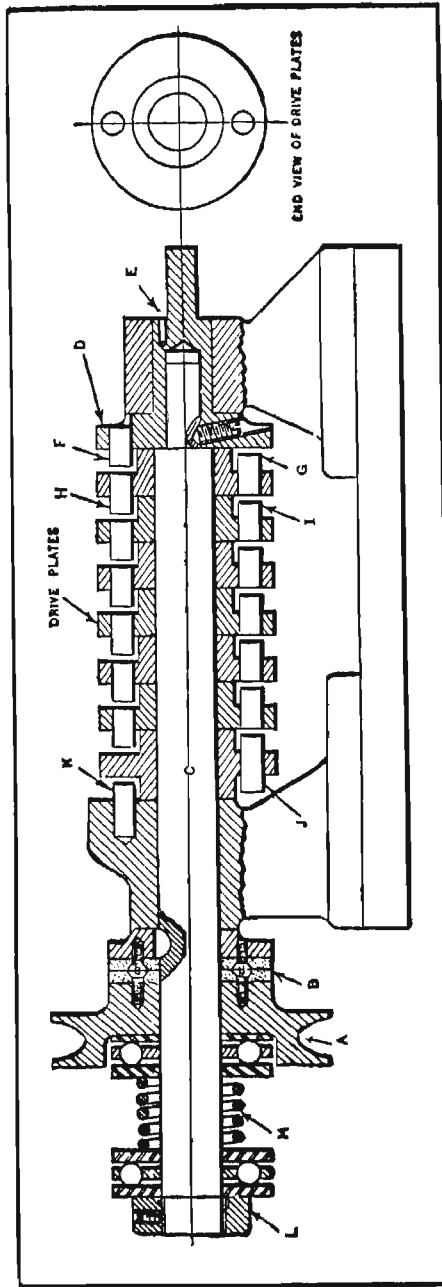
Accurate Stop Mechanism Used on a Spring Coiling Machine
